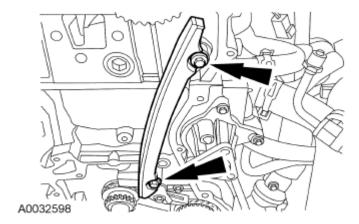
Locating Timing Chain Guide Bolts Courtesy of FORD MOTOR CO.
